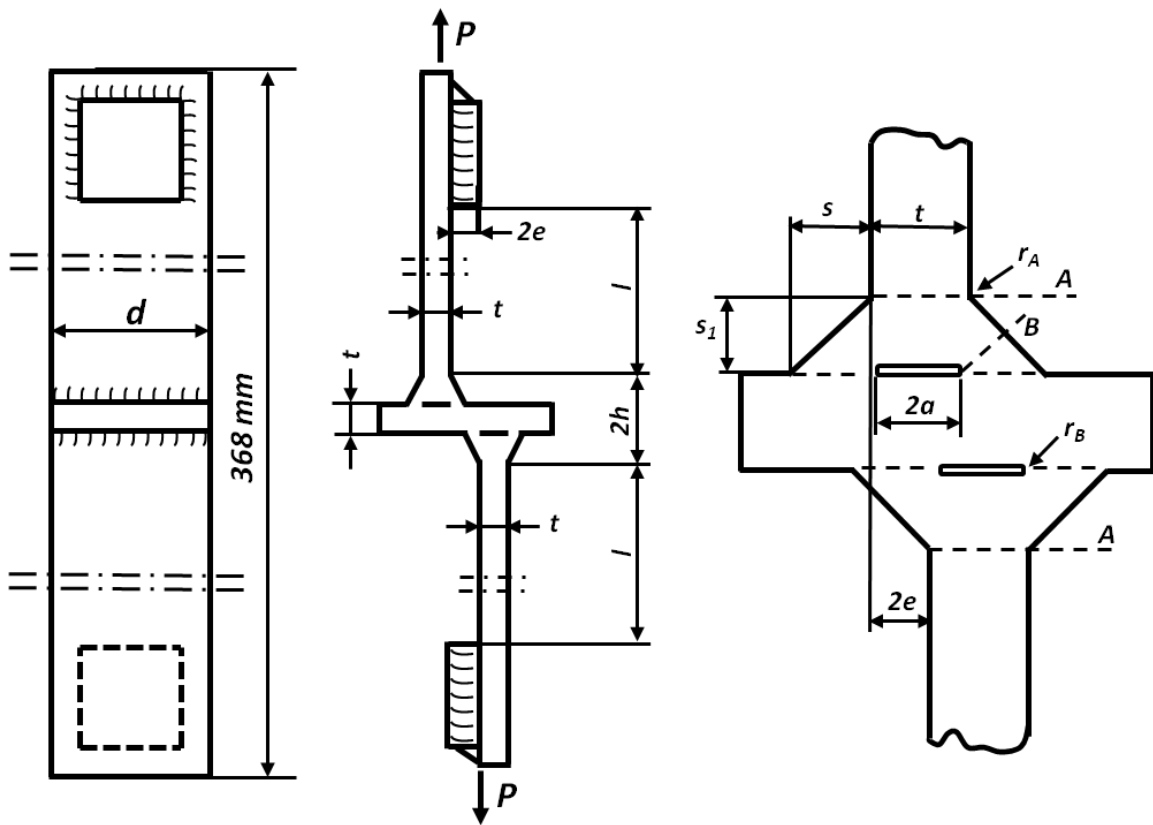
Specimen geometry and dimensions: (a) general geometry, (b) details of the weld geometry
